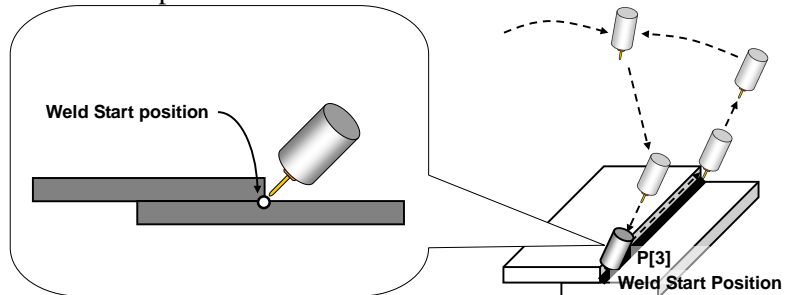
(d) Jog to Weld Start Position
